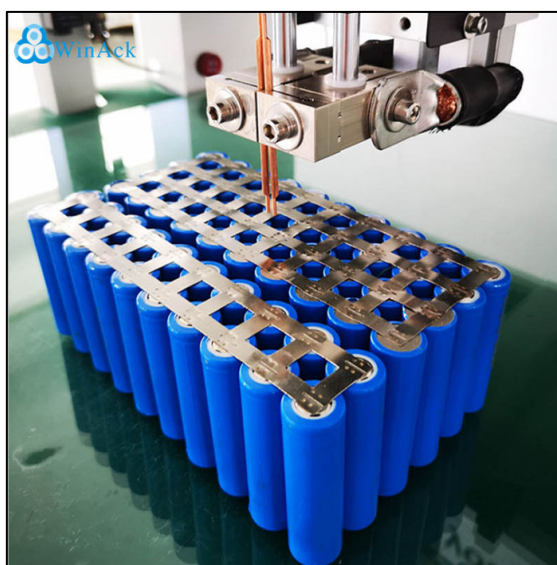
The Spot-welding Machine and the Lithium-ion Batteries being Spot Welded (WinAck, 2023).
